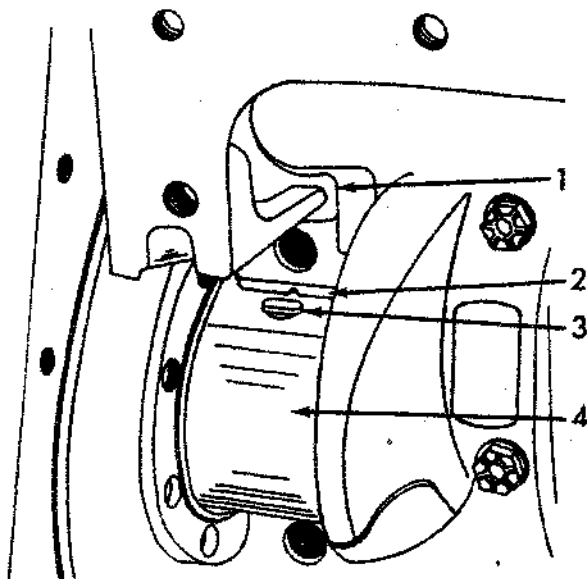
Removing Rear Main Bearing Upper Shell (T-51673)
